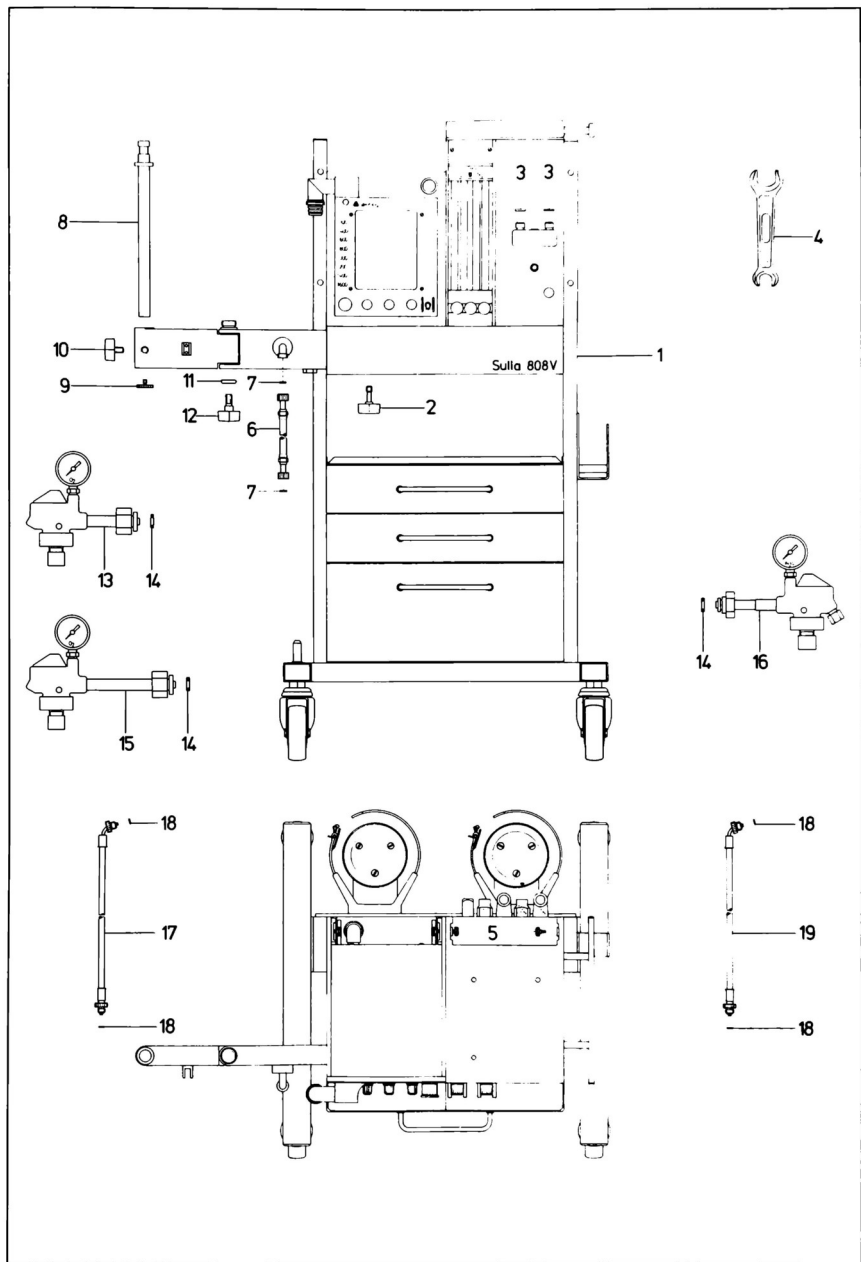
Component parts of Sulla 808 V (see Parts List)
